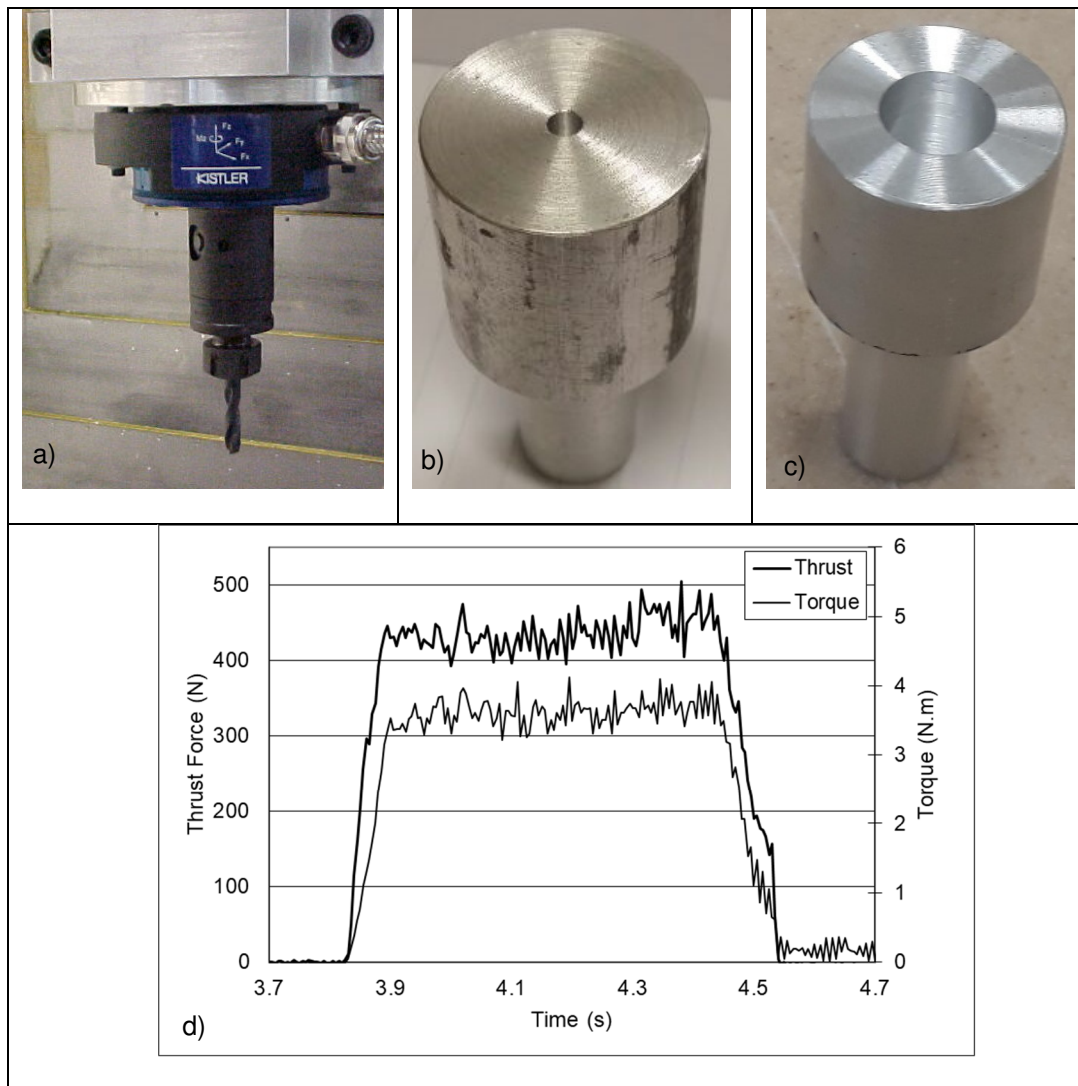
Photographs of a) drilling set up with dynamometer, b) Al 6061-T6 workpiece with pre-cored hole (diameter =3.5 mm), c) fully drilled workpiece, and d) typical torque and thrust force profiles.
